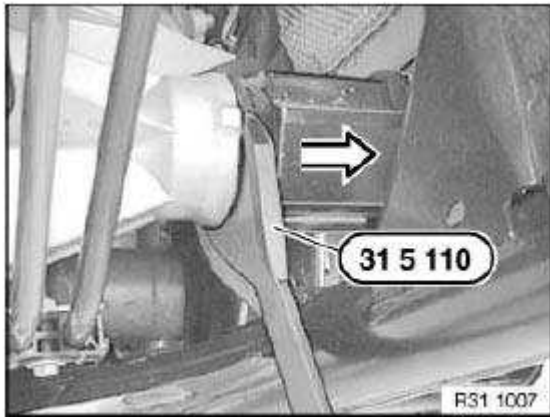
Removing Output Shaft From Front Differential/Bearing Block
